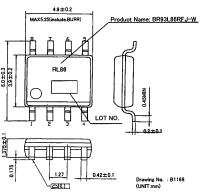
(e) PHYSICAL DIMENSION SOP-J8(BR93L86RFJ-W)
